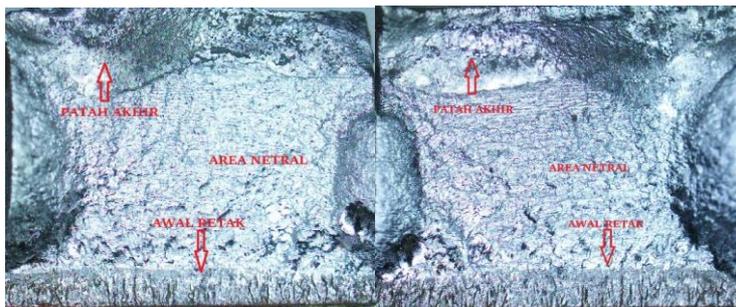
Macro observation results of the fracture surface of the test specimen fatigue with a loading angle of 3°
